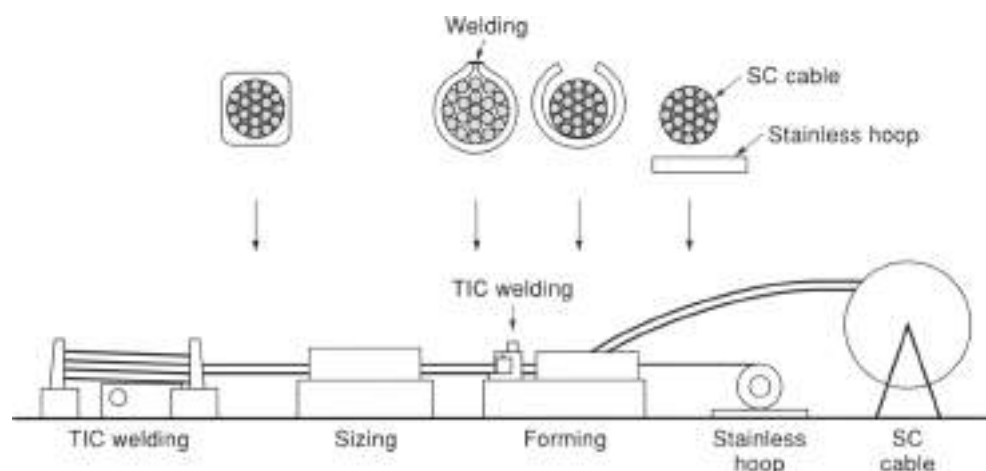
Scheme of the tube mill method for CICC, courtesy of JAFRI.
